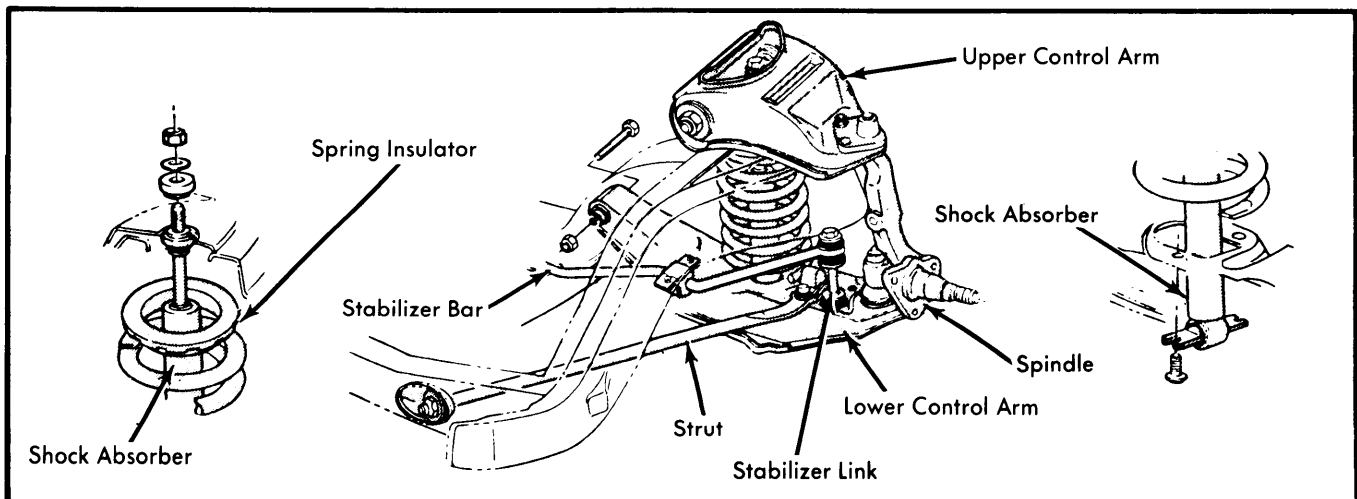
Exploded View of Ford Enclosed Spring Type Front Suspension
